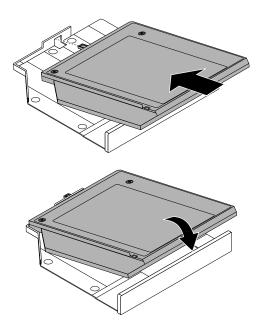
Installing the hard disk drive adapter into the adapter bracket
